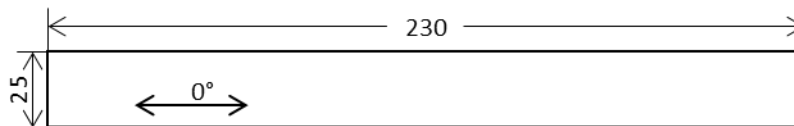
Coupon geometry for in-plane shear test, according to ASTM D3518/D3518M. All dimensions are expressed in mm.
